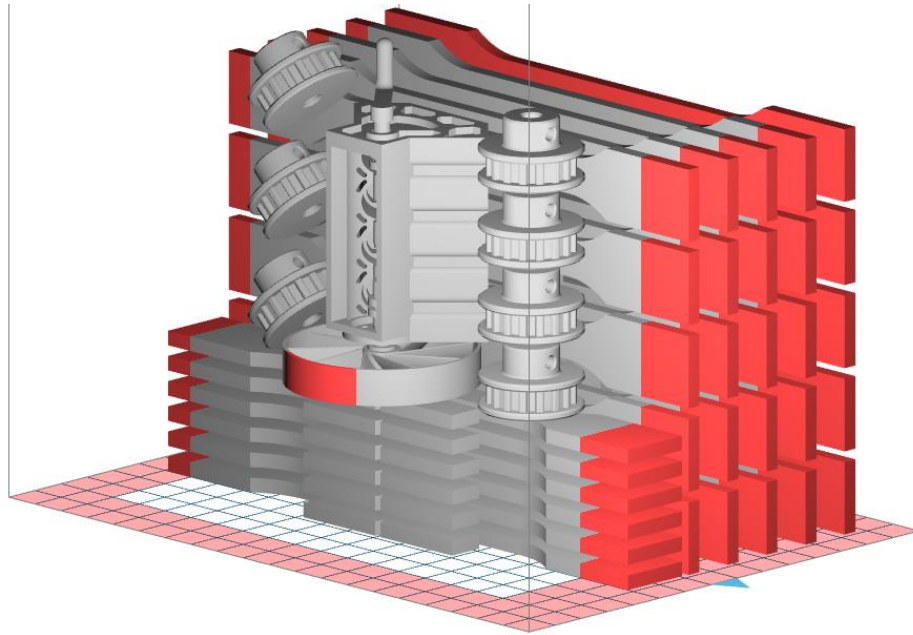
Isometric view of print layout of horizontal and horizontal-flat specimens manufacturing
